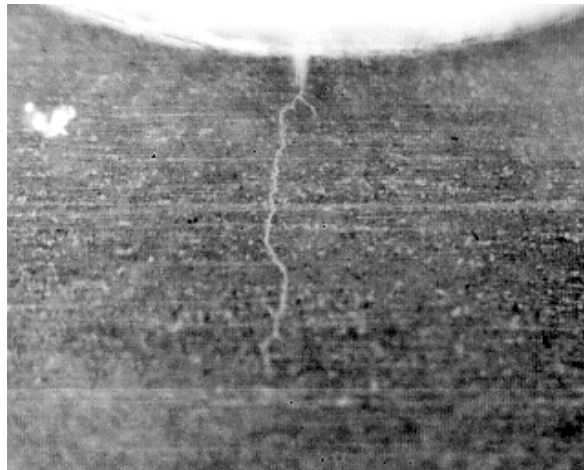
0.060" fatigue crack in 2024 aluminum bar imaged through 3.5 mil primer and topcoat.
